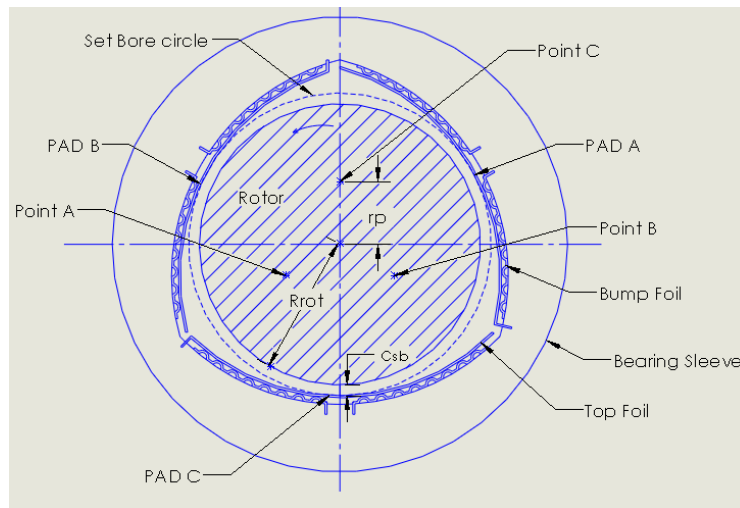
Schematic of a 3 pad HAFB configuration showing set bore clearance and preload.
